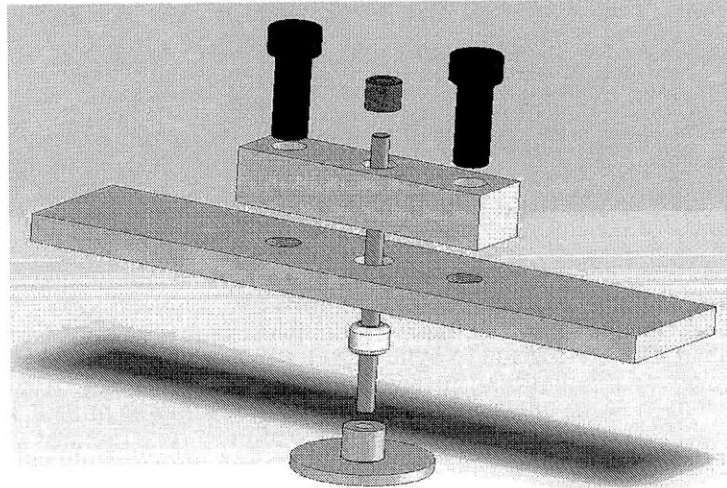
An exploded view of the test setup for the prototype flexures. The one way needle bearing is on the lower part of the shaft and the flexure mounts to the bottom of the disk in the lower portion of the image.
